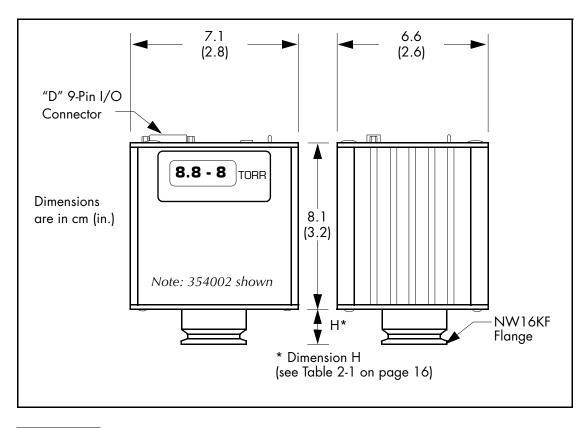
Micro-Ion Gauge Module Dimensions.
